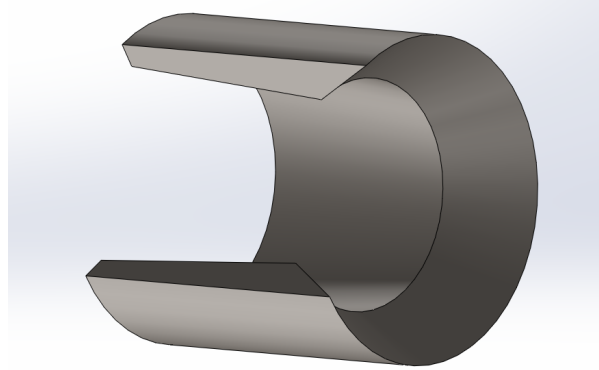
Cutaway of penetrator for full-scale nominal case.
